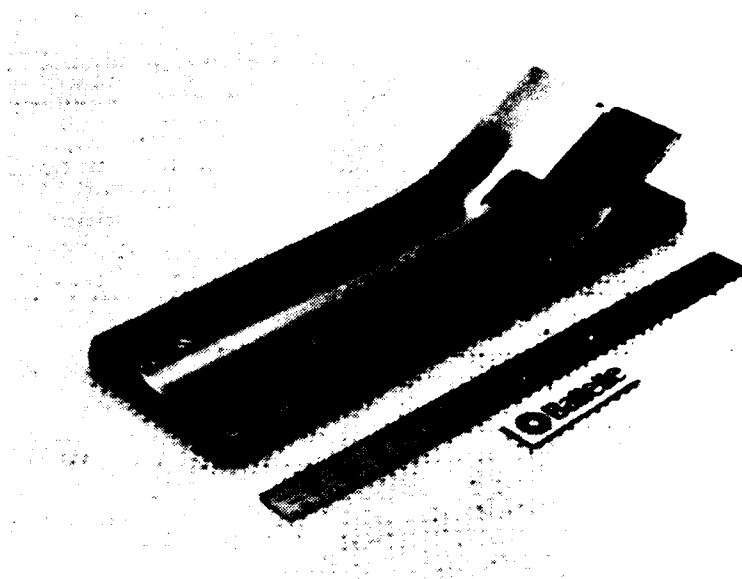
Linear strip weld made with optimum explosive welding conditions.
